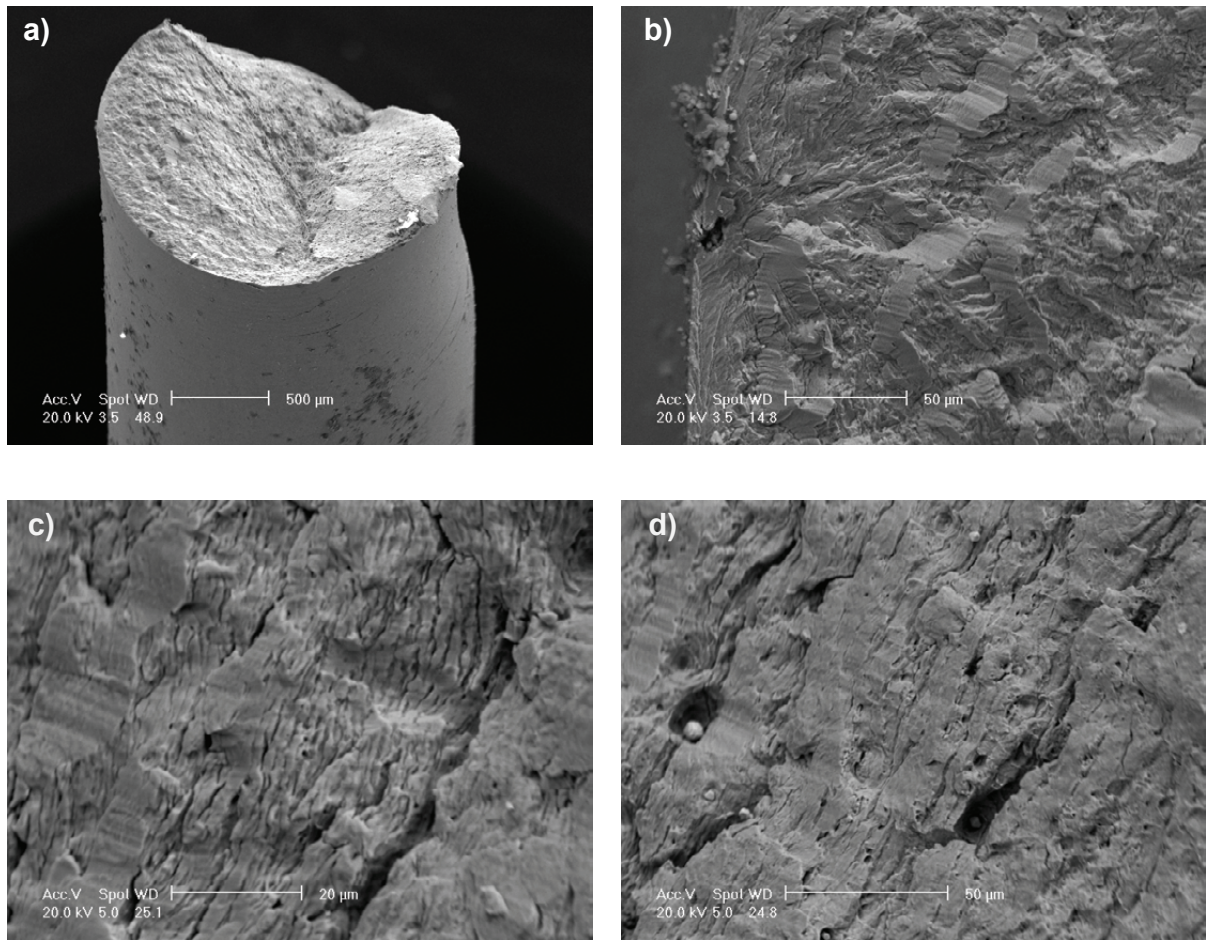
SEM micrographs of OT 02 (71 dpa/ 334 °C) after LCF test at $\Delta\epsilon_{\text{tot}} = 0.8\%$ at 330 °C: a) an overall view; b) fracture appearances close to the specimen surface; c) fracture appearances in the middle area of the fatigue crack propagation; d) fracture appearances close to the end the fatigue crack propagation.
